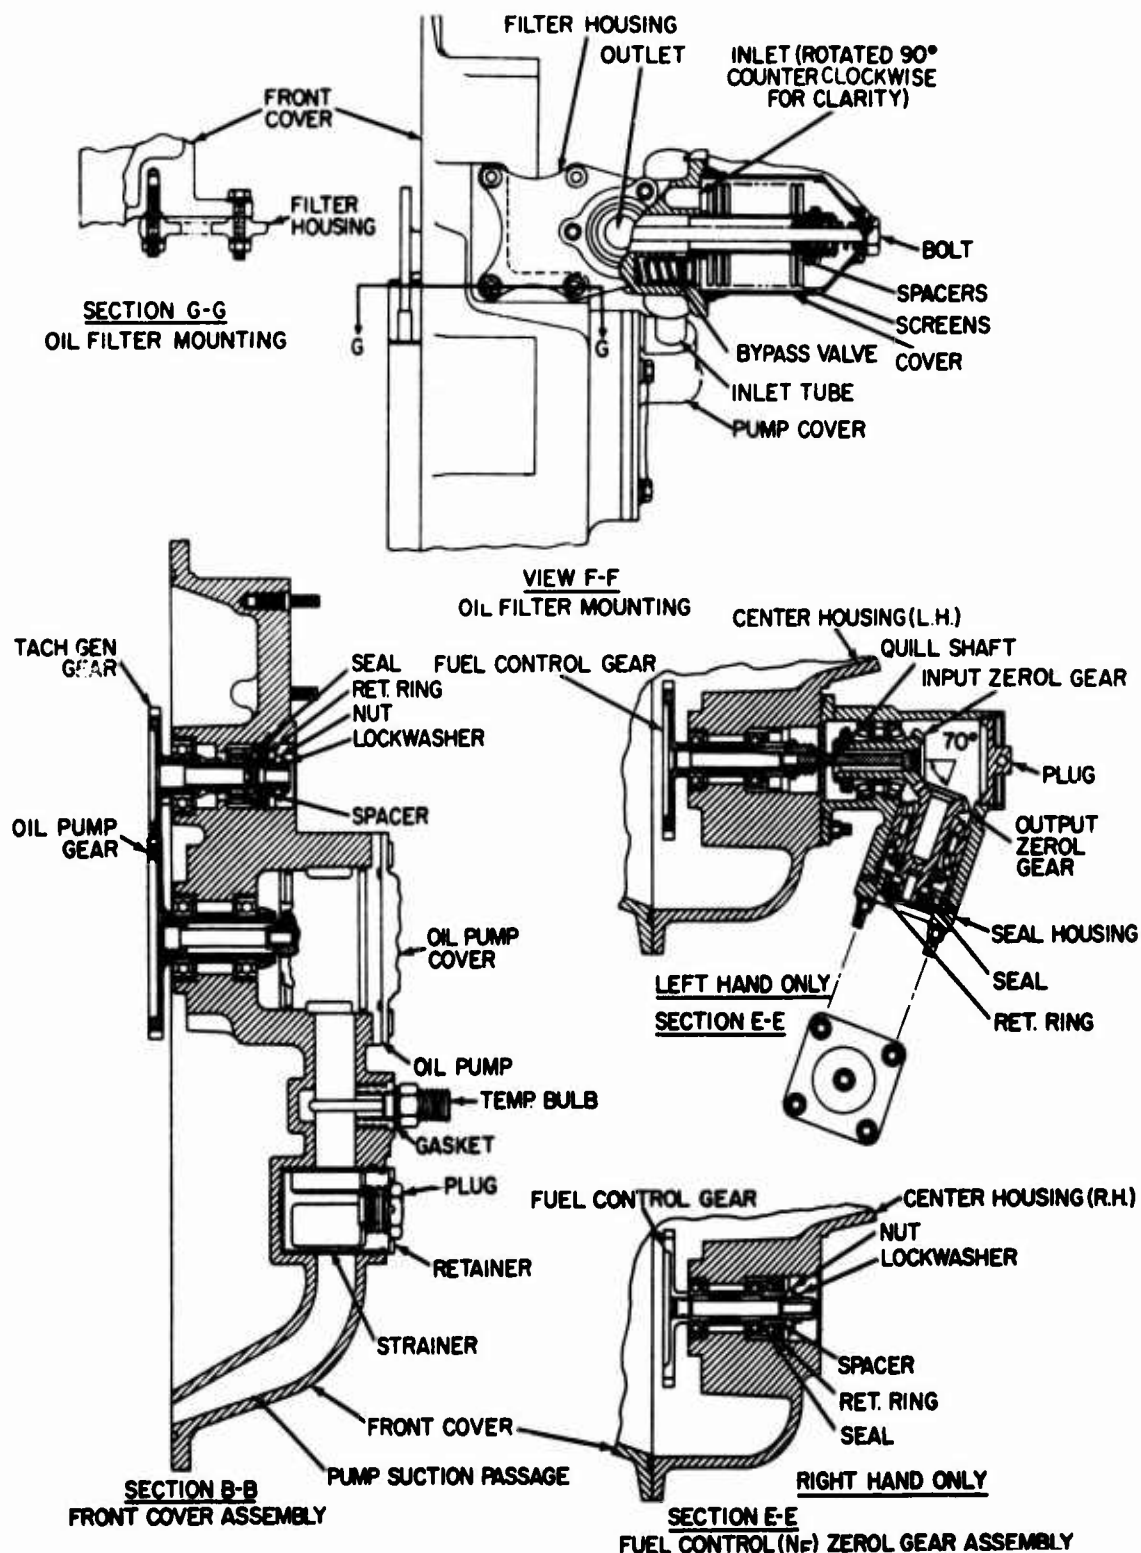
CH-53 Nose Gearbox - Details (Left-Hand Shown - Right-Hand Opposite).
